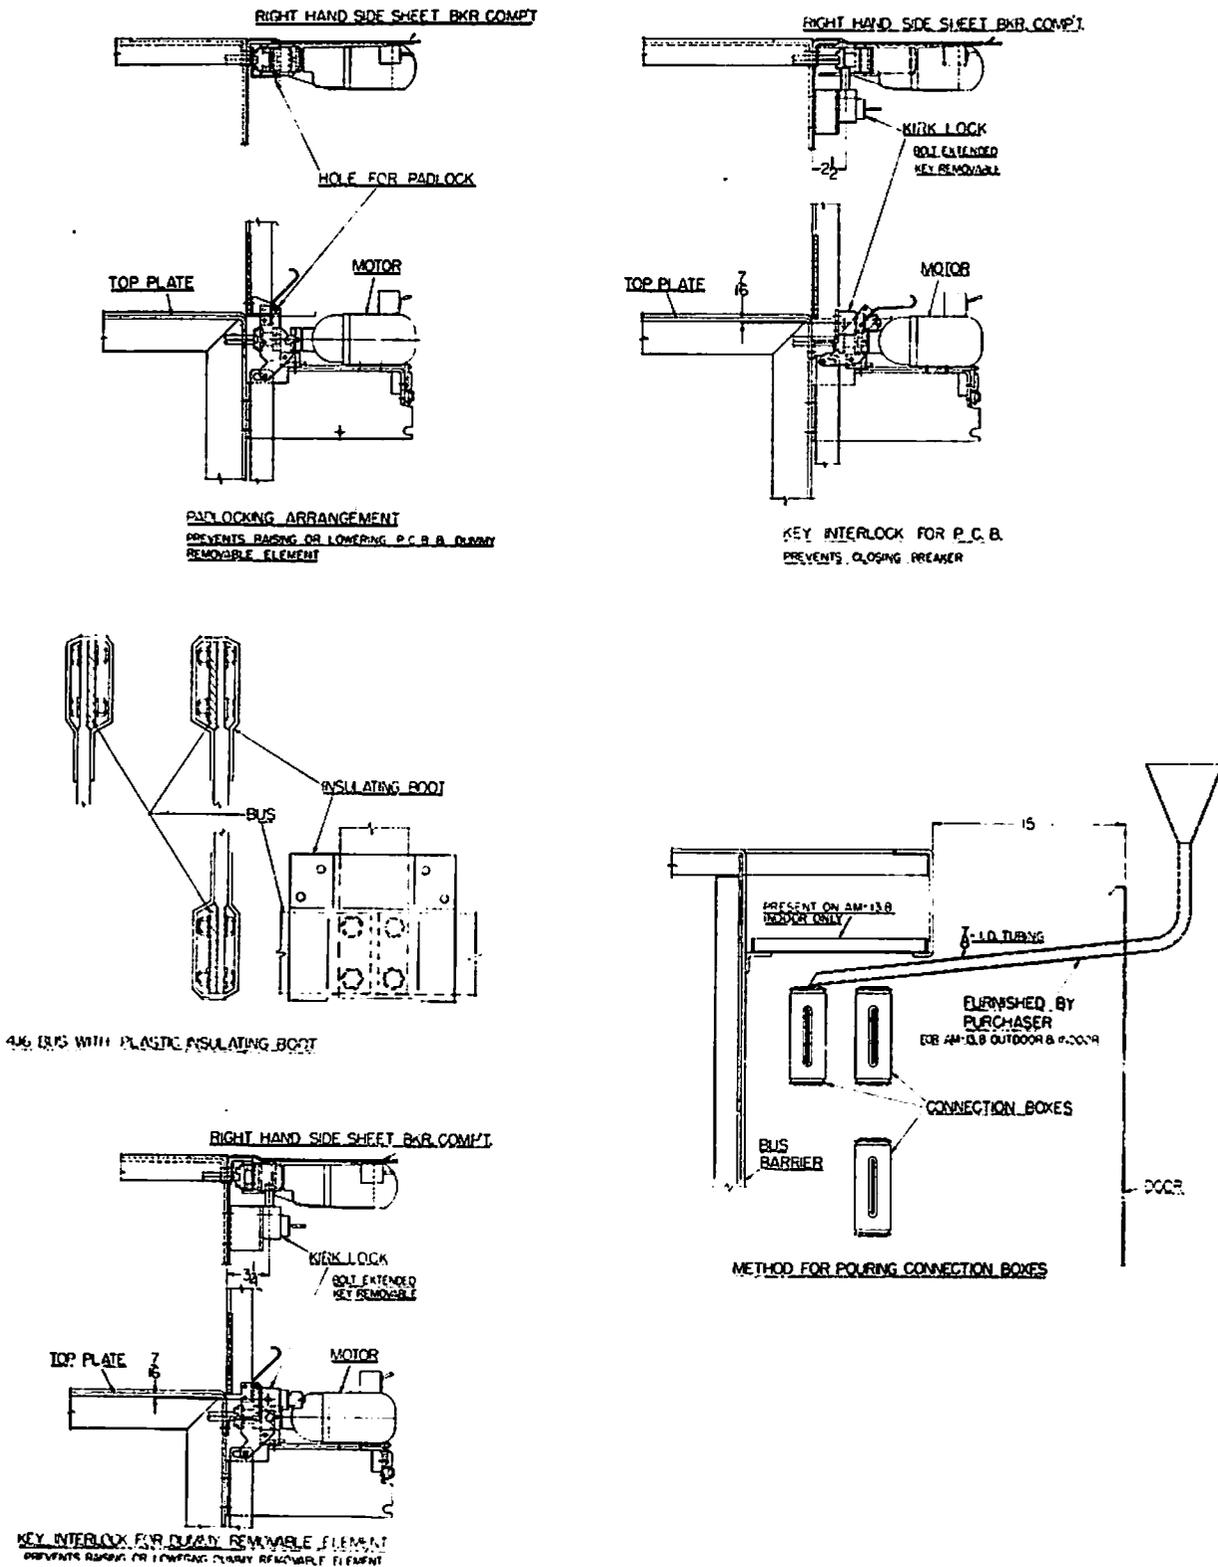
Padlocking Arrangement, Key Interlocking and Method for Pouring Connection Boxes
